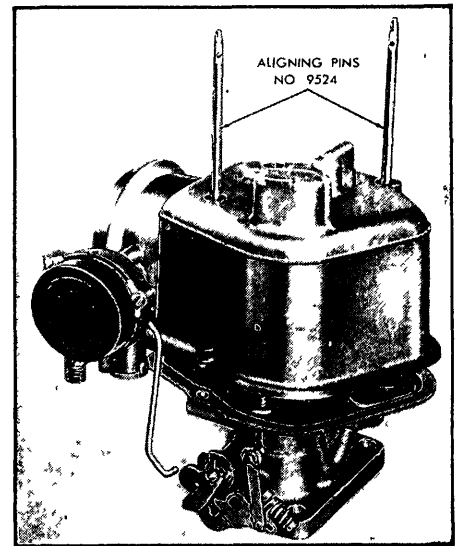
D Installing carburetor air horn with aligning pins. 1949-51 Lincoln and Mercury carburetor
